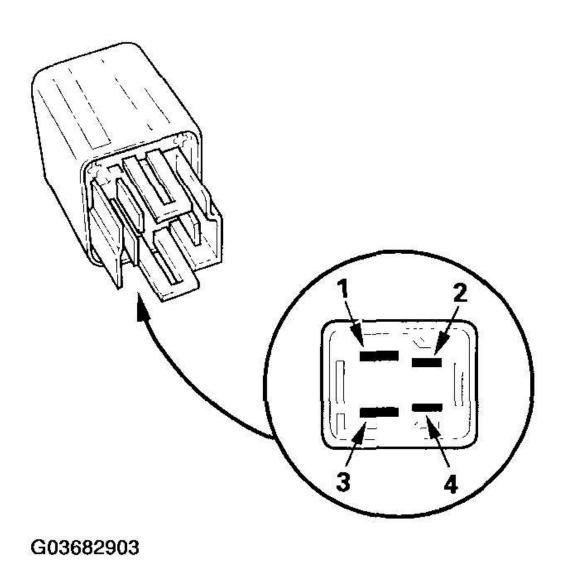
Identifying Blower Motor Relay, Type 2 Courtesy of AMERICAN HONDA MOTOR CO., INC.
